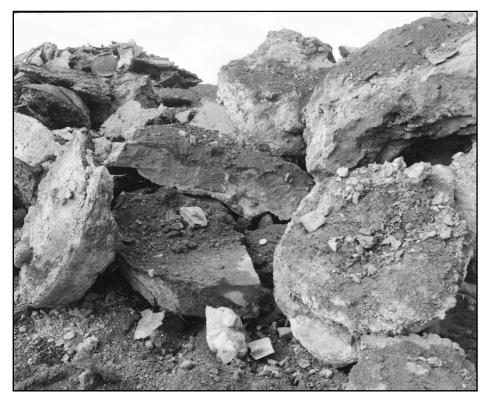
Scrap waste from melting knocked out from base of previous melts (film 13:4)
